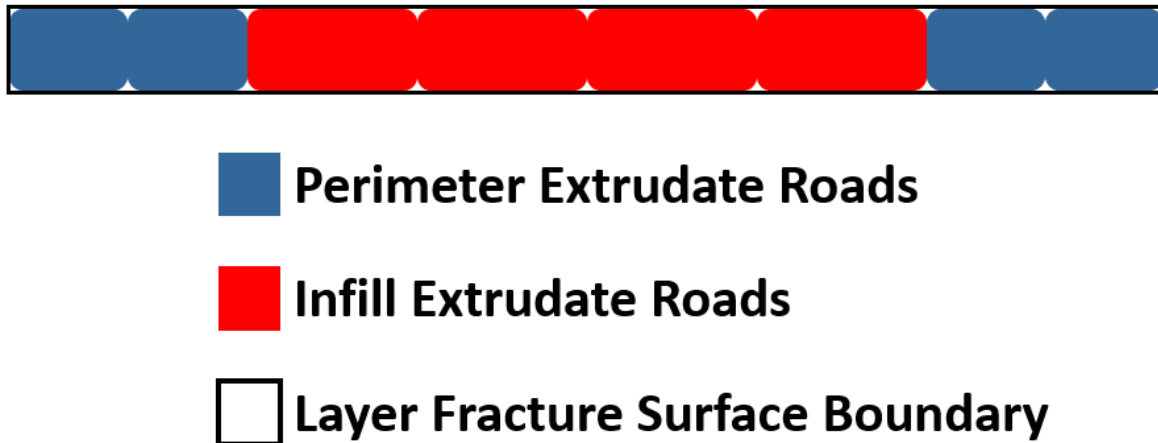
An illustration of the calculation fracture surface for minimum cross-section fracture of a tensile specimen produced with two perimeter roads. The cross section of the perimeter roads are shown in blue and the cross-section of the infill roads are shown in red.
